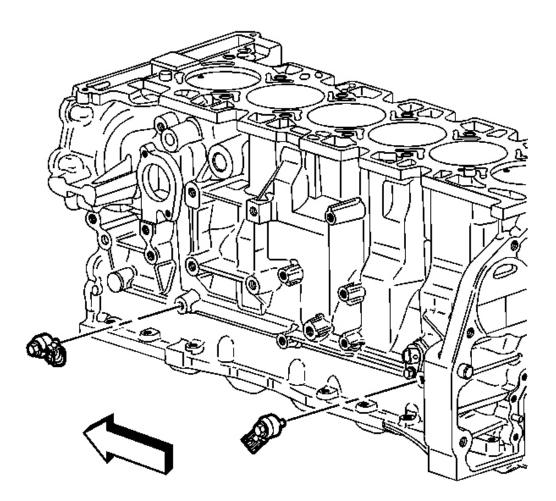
View Of Knock Sensors Courtesy of GENERAL MOTORS CORP.
